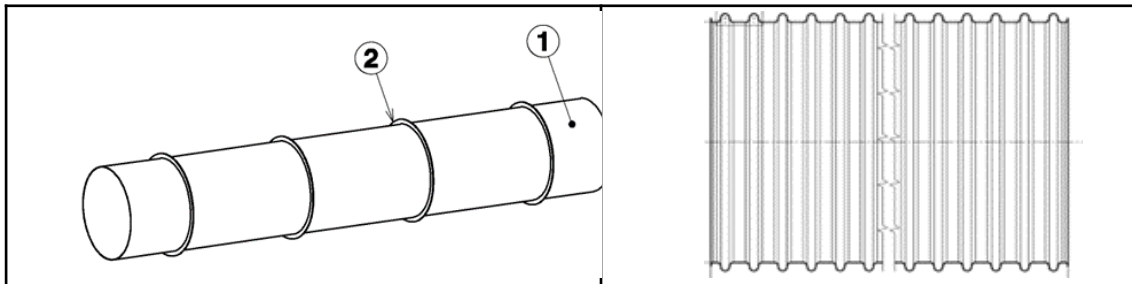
Schematic design of the smooth tube unit reinforced with stiffeners (left side) and a section of the corrugated tube (right side).
